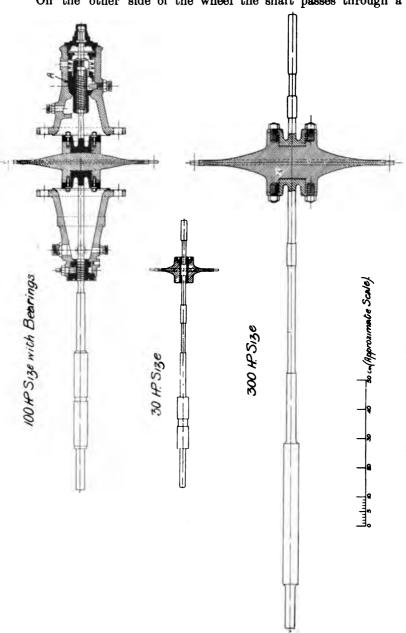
Shafts and Wheels of de Laval Steam Turbines.
